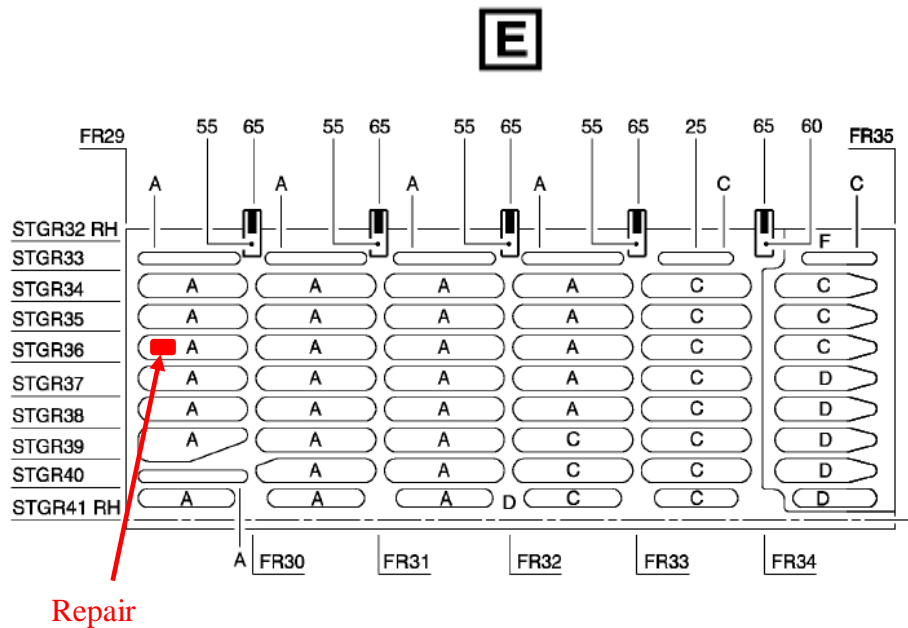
Skin Plates between Frame 29 – 35 & Stringer 32 Right Hand Side – 41 Right Hand Side
